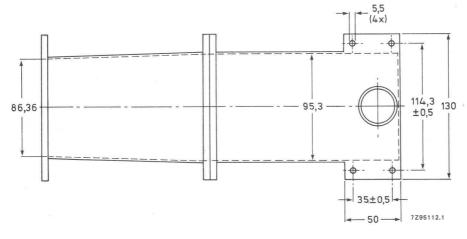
Coupling section for YJ1540 into a waveguide R22.
